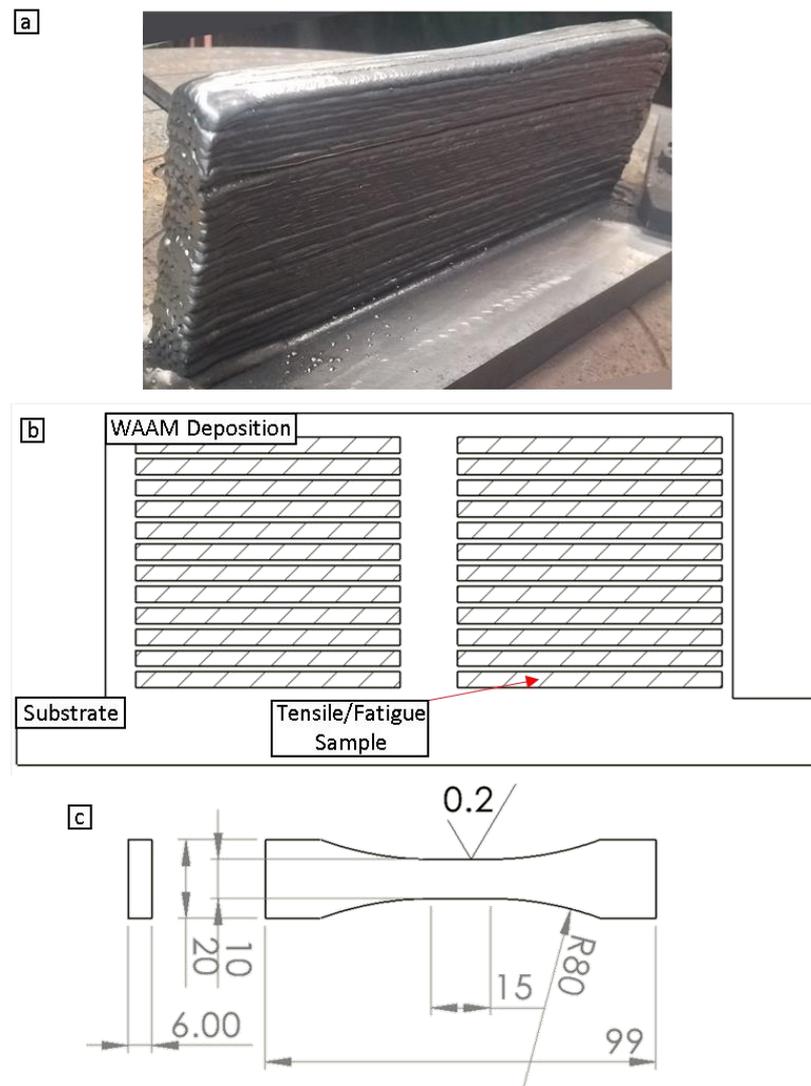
(a) Image of the deposited wall of material; (b) schematic of individual samples extracted from deposited material; (c) dimensions of tensile and fatigue samples.
